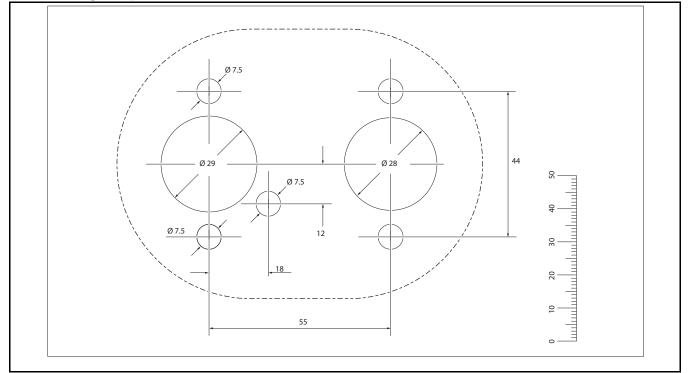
Drilling Template for Heater Installation (Dimensions in millimeters)
